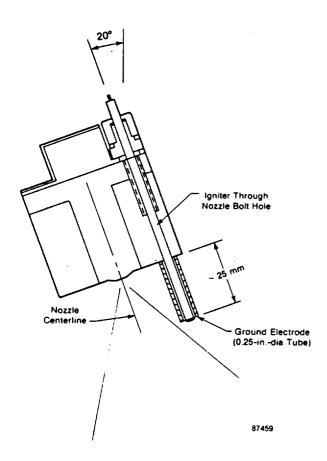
Igniter Location for 3-Hole Conical Nozzle in Mod II CGR Combustor
